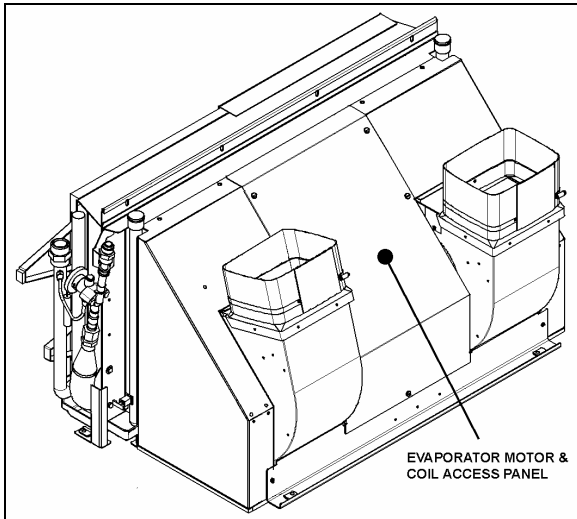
EVAPORATOR COIL ACCESS PANEL 22244
